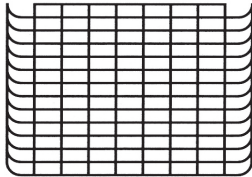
Plan A—Notching and wire bending diagram for large cage door.
